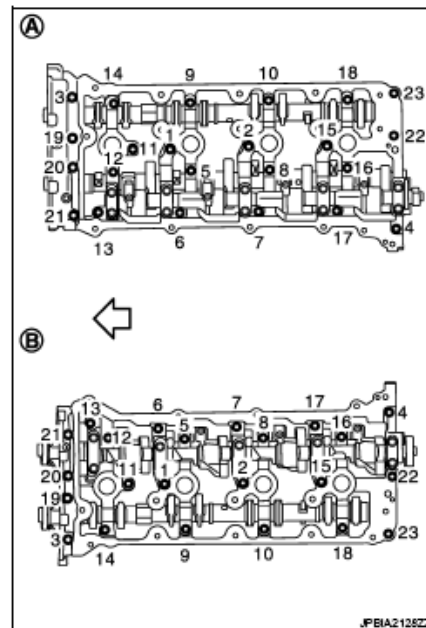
Identifying Cylinder Head Mounting Bolt Loosening Sequence
